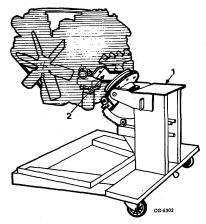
Engine Installed in SE-1962 Overhaul Stand With Mounting Plate
